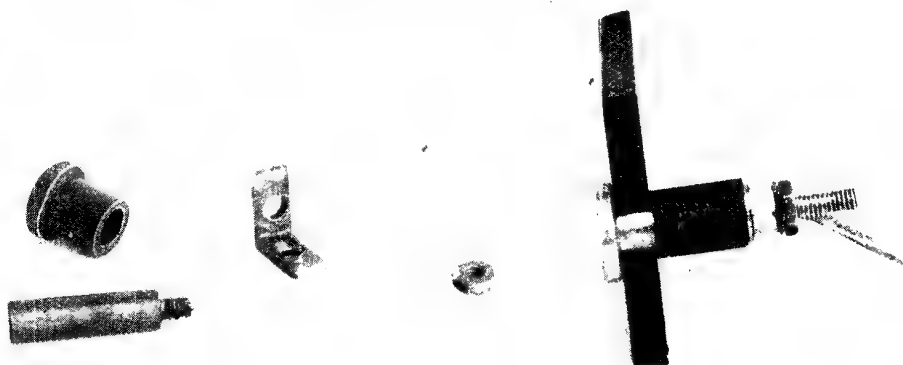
Here are shown the components of the socket seen in Fig. 2. Note the flange on the bush
